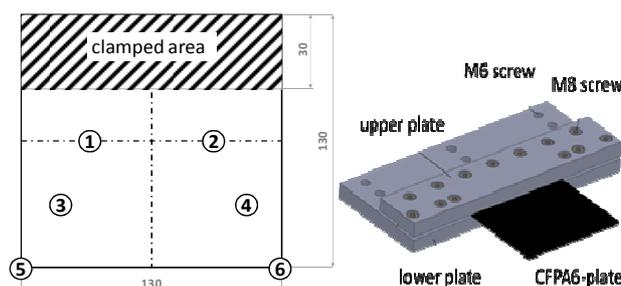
Defined six degrees of freedom (DOFs) points for modal tests on Ce-Preg[®] plates (left); clamping tool for Ce-Preg[®] plates (right)
